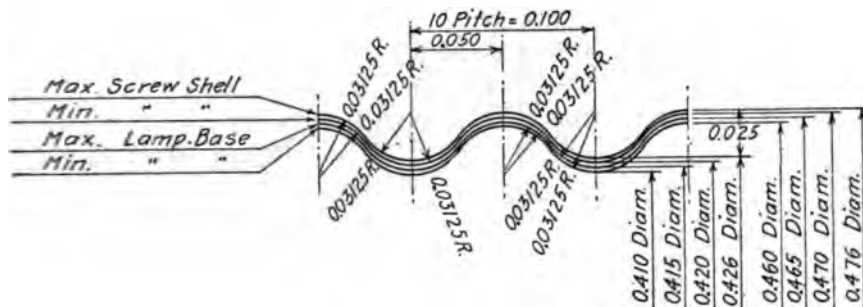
FORM AND DIMENSIONS OF THREADS FOR LAMP BASE AND SOCKET SCREW SHELLS, CANDELABRA SIZE
